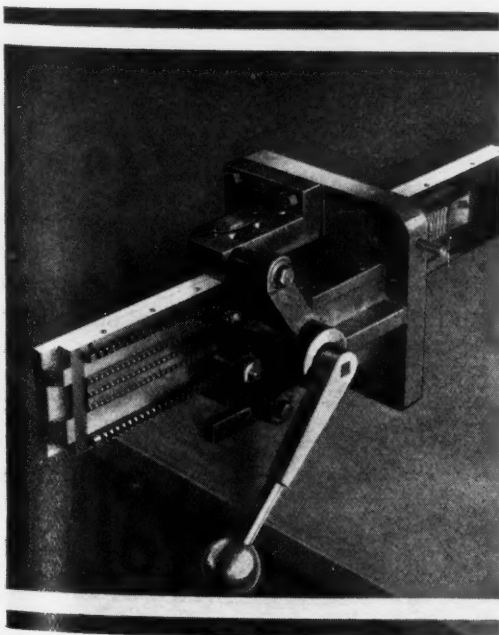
Broaching Fixture Designed to Insure Washing Away of Chips and Ejection of the Work
